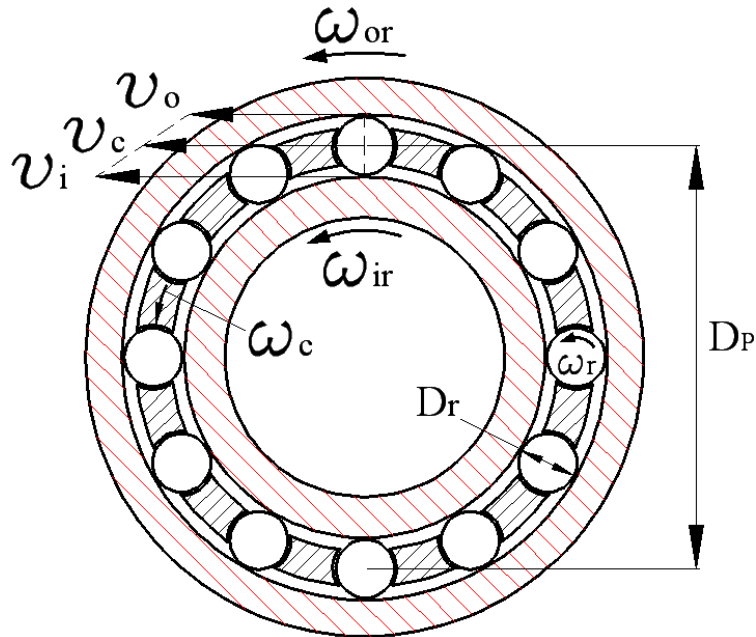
Kinematics in a cylindrical bearing (without slip)
